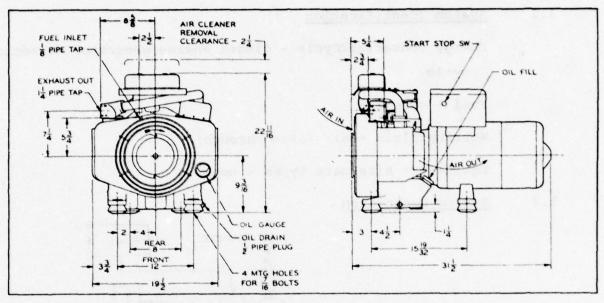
10 KW air cooled Onan CCKB Gasoline Engine-Generator
